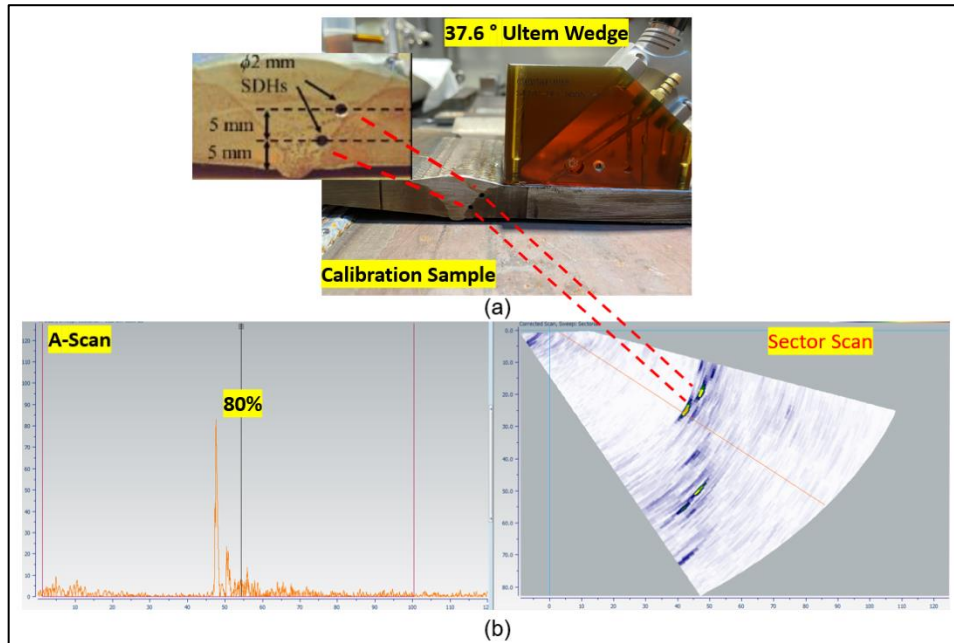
Gain calibration at 55 dB using a welded sample with two side-drilled holes of  $\phi$  2 mm for PAUT-NDT inspection: (a) Two side-drilled holes of 2 mm used as reflectors, (b) A-scan indicates the received signal from the reflector fixed at 80% of the screen height, and sector scan on the right showing the volumetric result of the inspection
